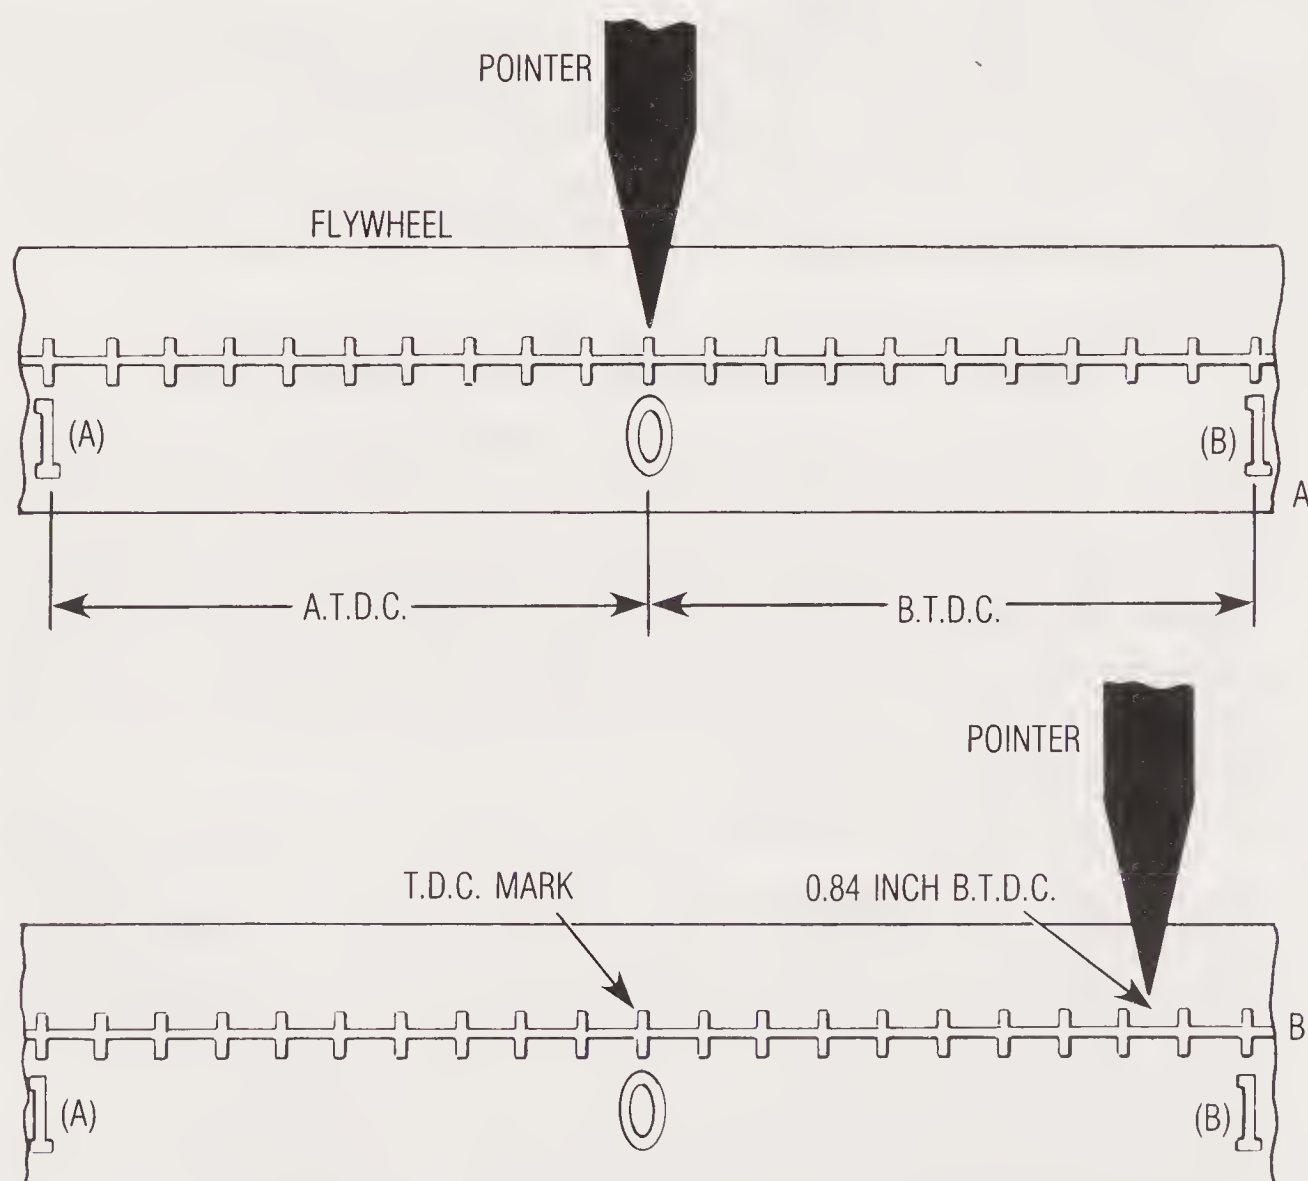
Degrees converted to inches on flywheel or balancer.
